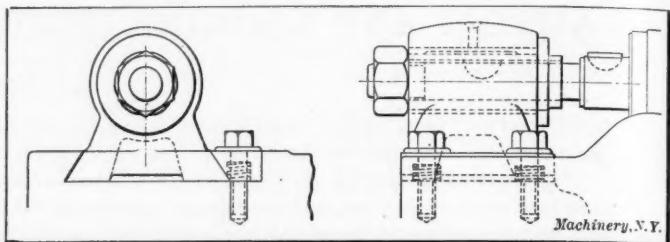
Clamping Strip with Springs for Raising the Strip when Released
